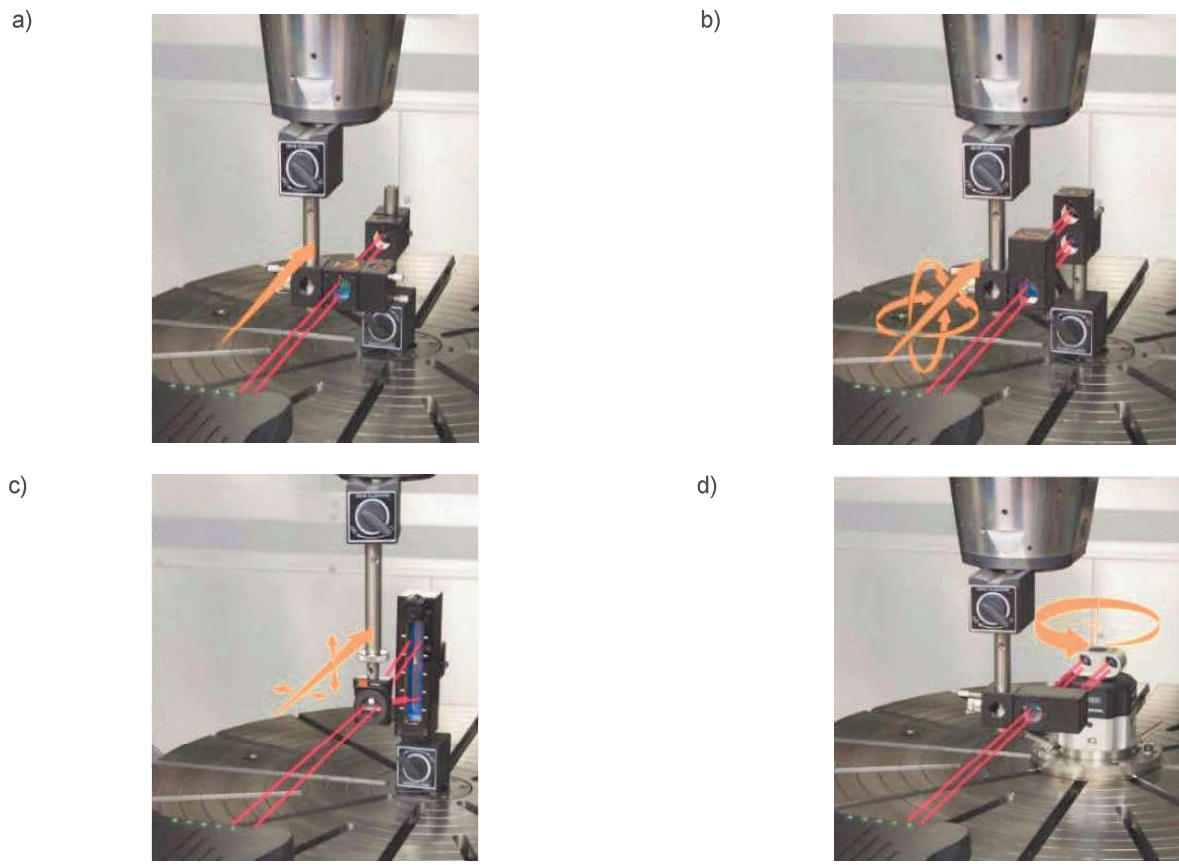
Renishaw XL-80 laser interferometer in the configuration for: a) linear measurements, b) angular measurements, c) straightness measurement, d) rotary axis measurement using the XR20-W head [6]
